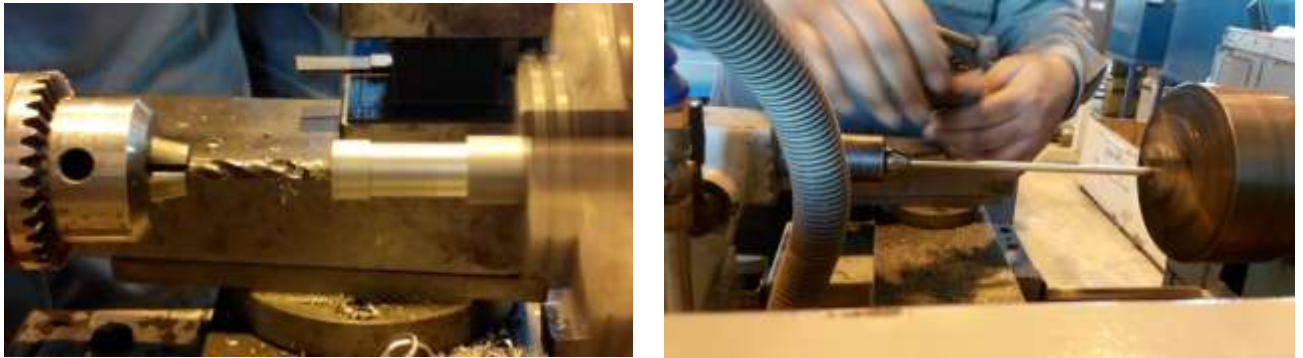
Fabrication of different parts on High speed lathe machine.
